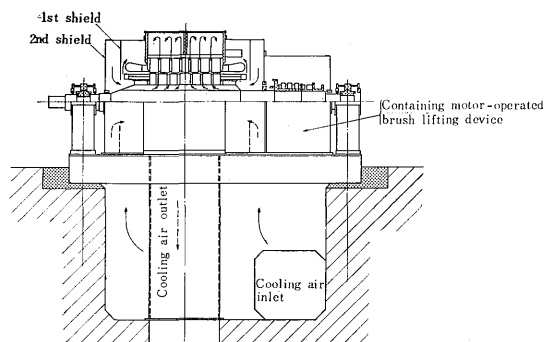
Section view of ventilating system pressurized explosion-proof wound rotor type induction motor
